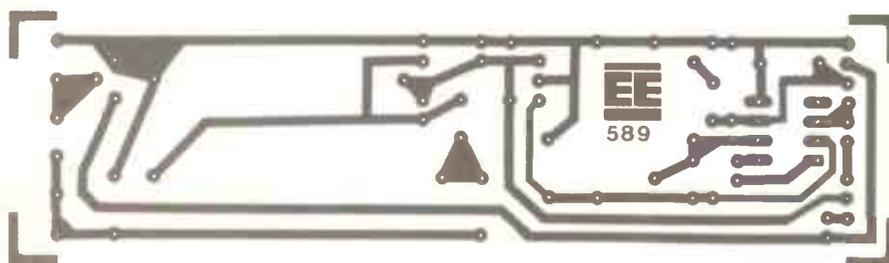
P.c.b. layout and wiring plus inter-connection details.
